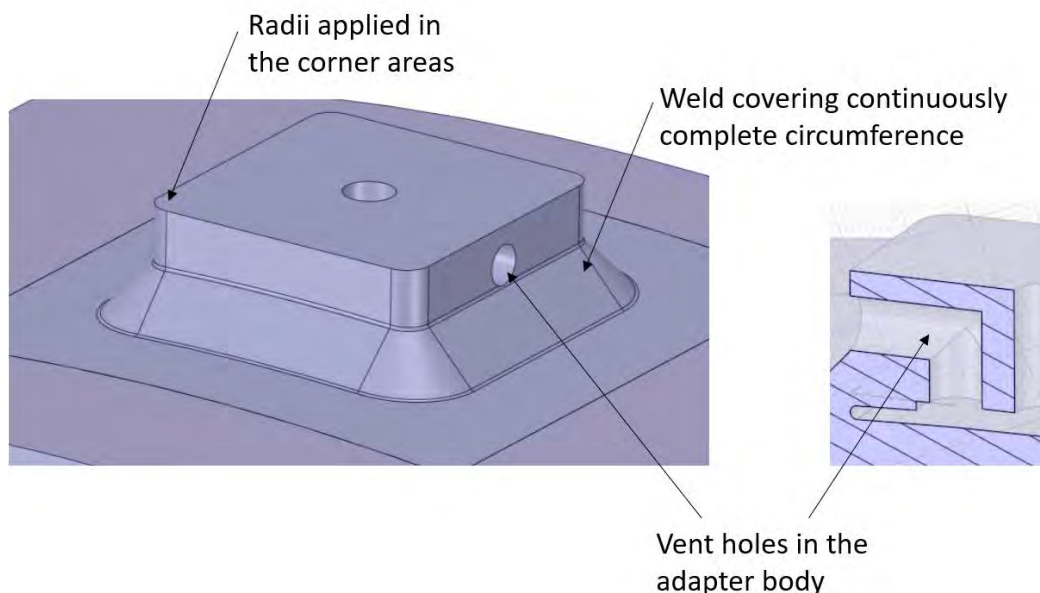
Proposed approach for manufacturing and welding adapters illustrated on the case of HFS adapter
